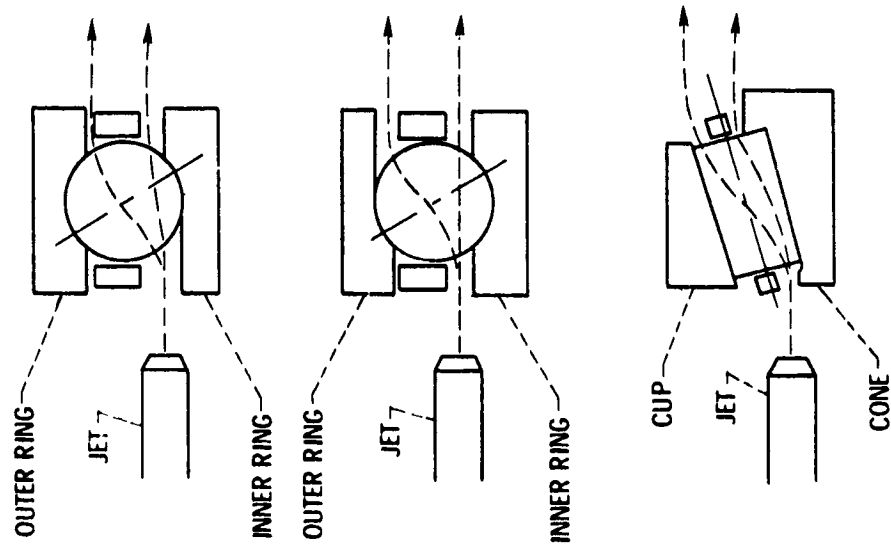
Placement of jets for ball bearings with relieved rings and tapered-roller bearings.
